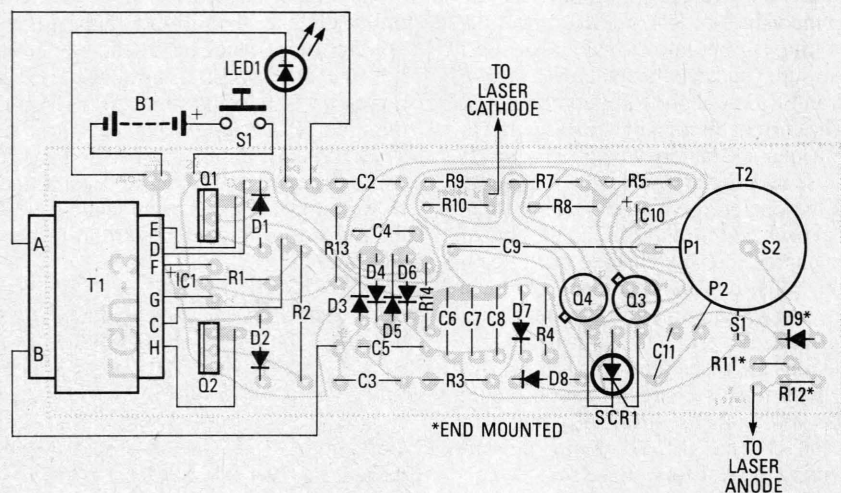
IF YOU CHOOSE to use the PC board provided in our PC Service section, use this parts-placement diagram.
